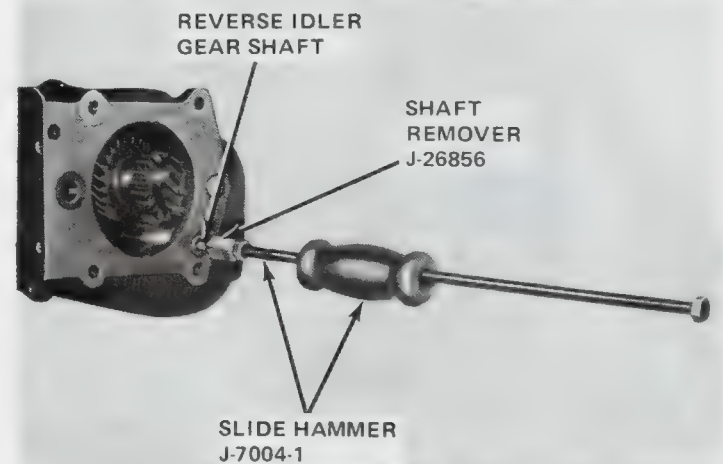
B-54 Reverse Idler Gear Shaft Removal
